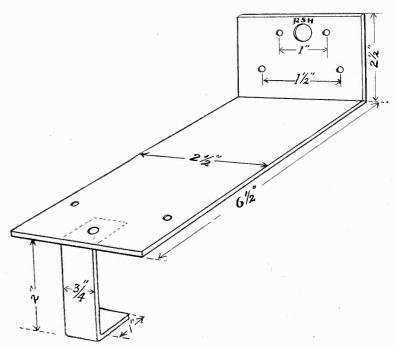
View of the mounting for the sockets, transformers and rheostat, with all dimensions accurately marked. It should be made of fairly heavy sheet brass or copper.
